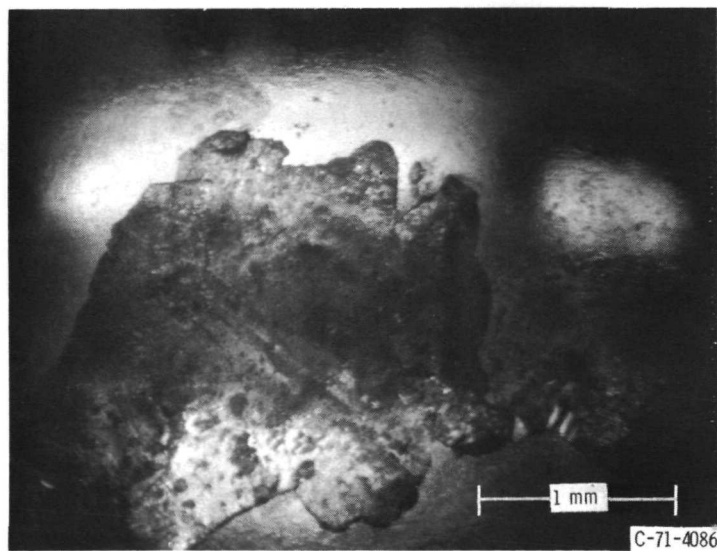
Lead debris transferred to ball surface from retainer of bearing 8.
